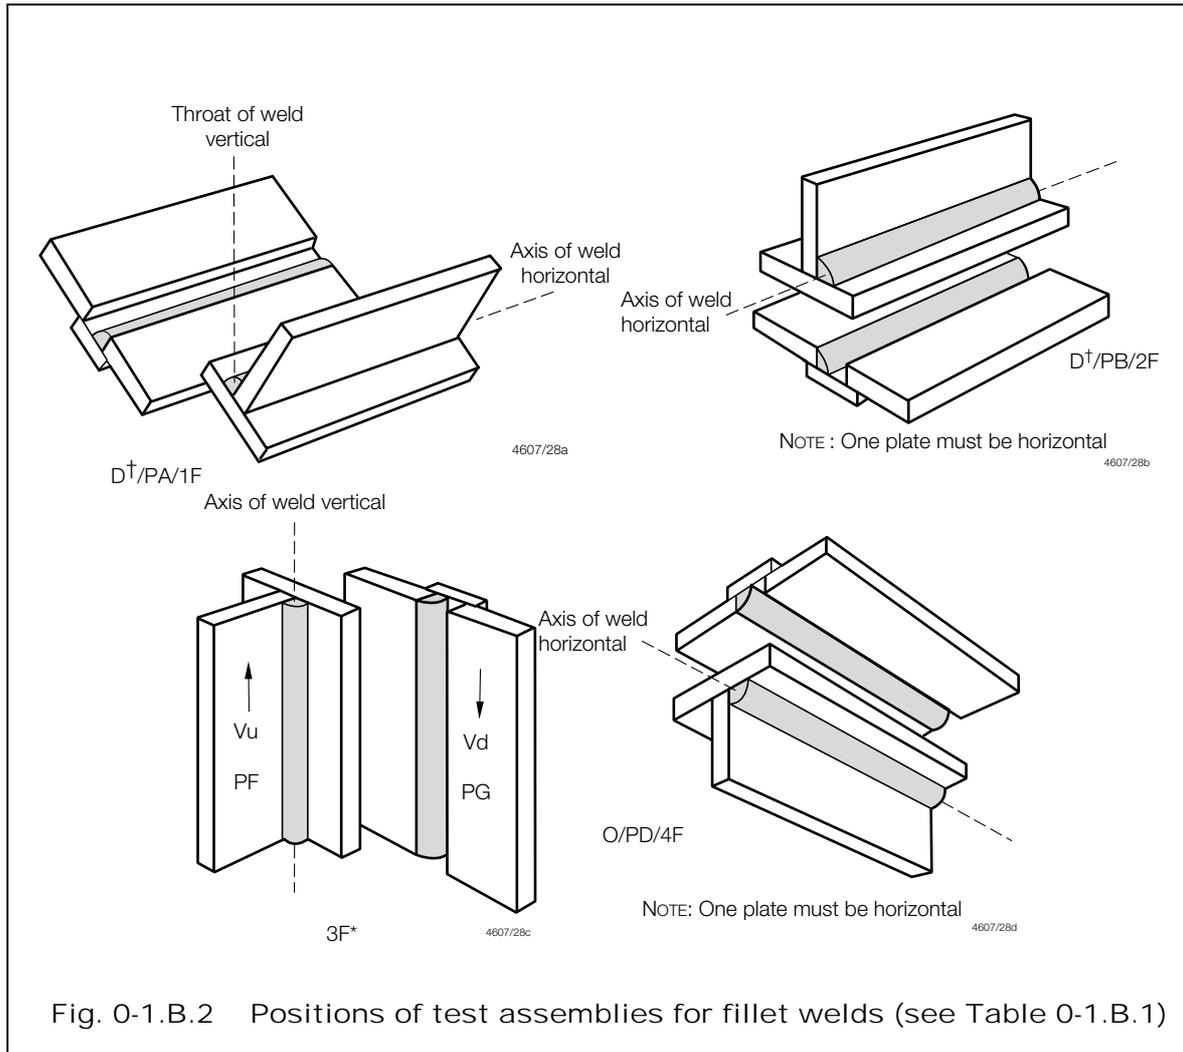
B.2 Positions of test assemblies for fillet welds (see Table 0-1.B.1)
